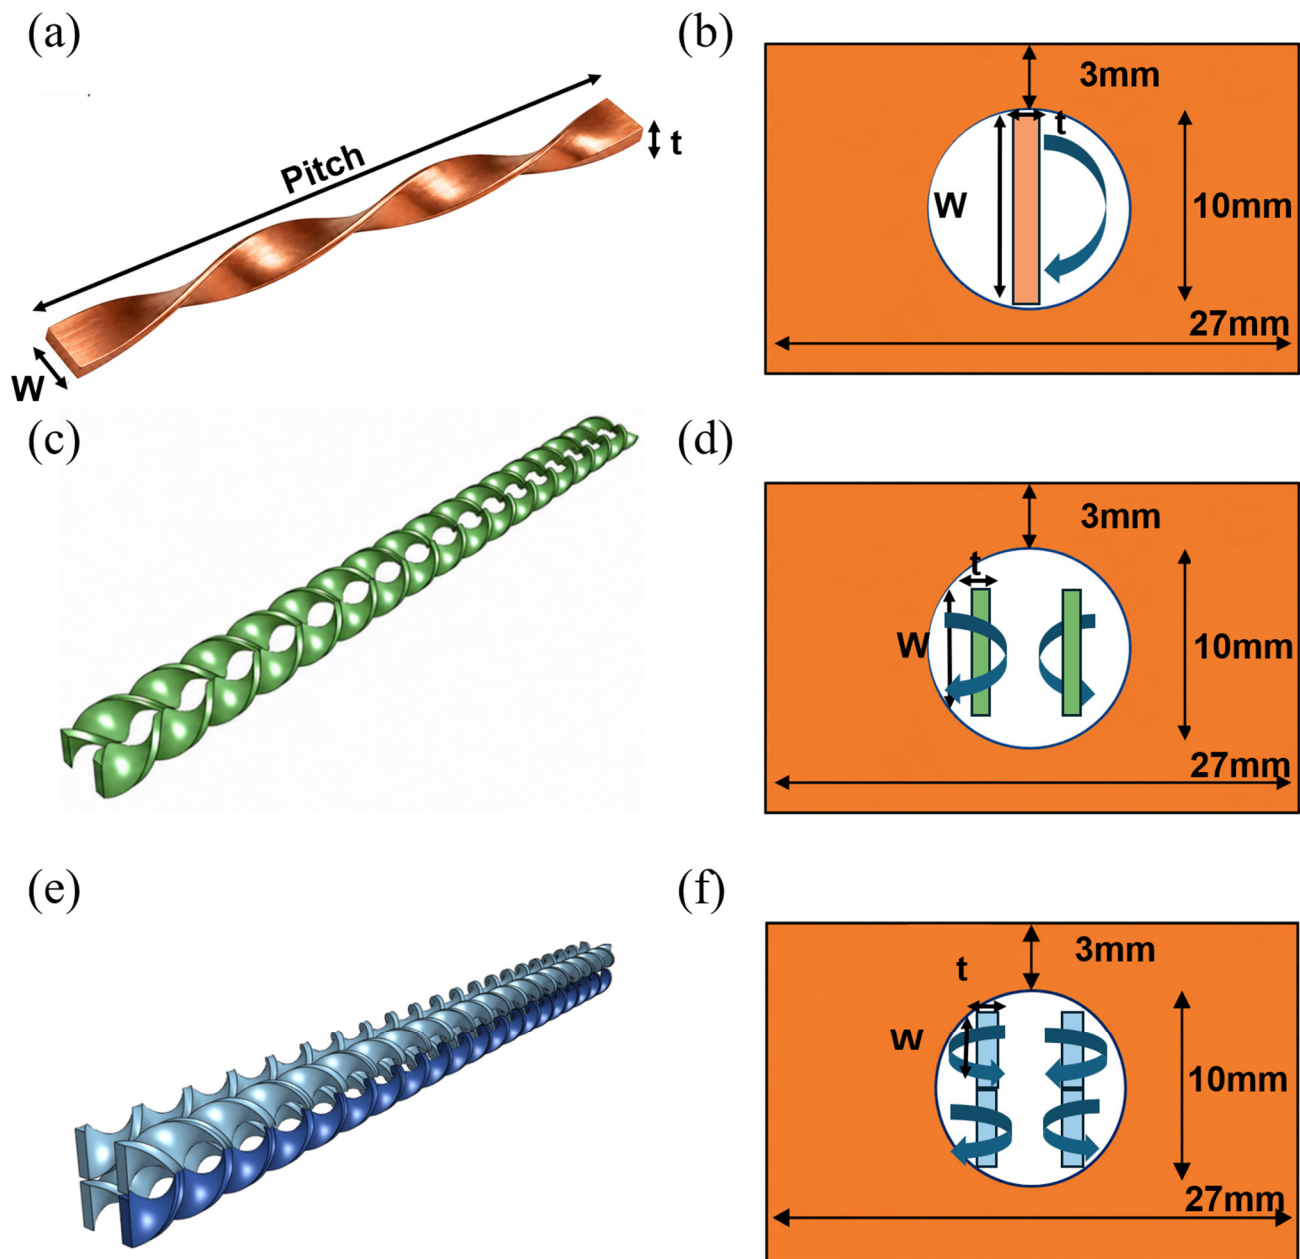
(a) Single-swirl insert tube, (b) section view of single-element swirl insert tube, (c) two-element multi-swirl insert tube, (d) section view of two-element multi-swirl insert tube, (e) four-element multi-swirl insert, and (f) section view of four-element multi-swirl insert.
